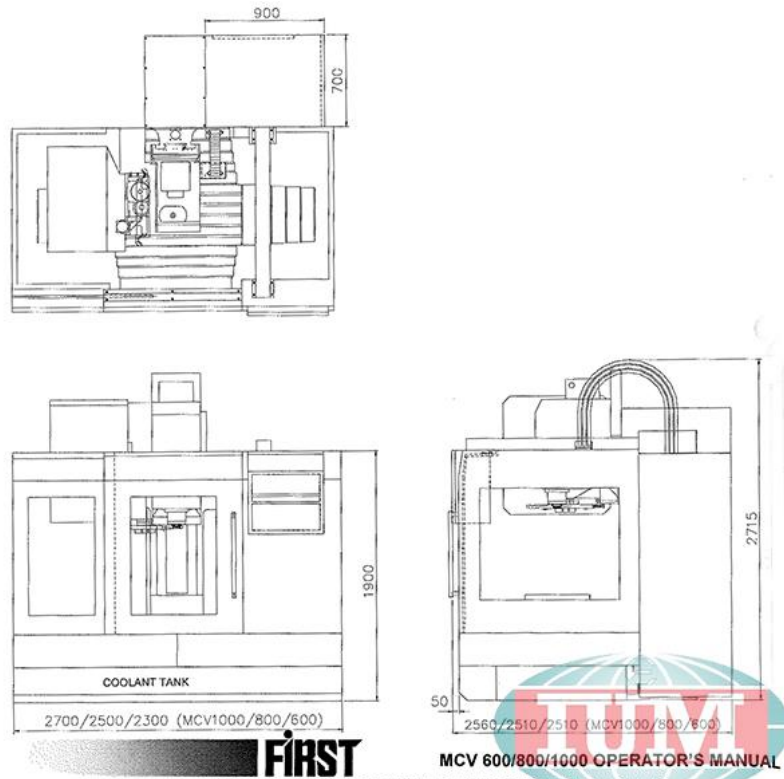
APPEARANCE AND PRINCIPAL DIMENSION OF THE MACHINE
